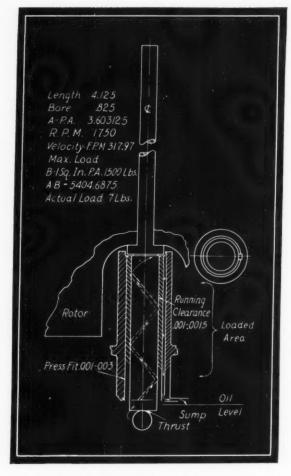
By using this leaded bronze bearing momentary zero lubrication is
